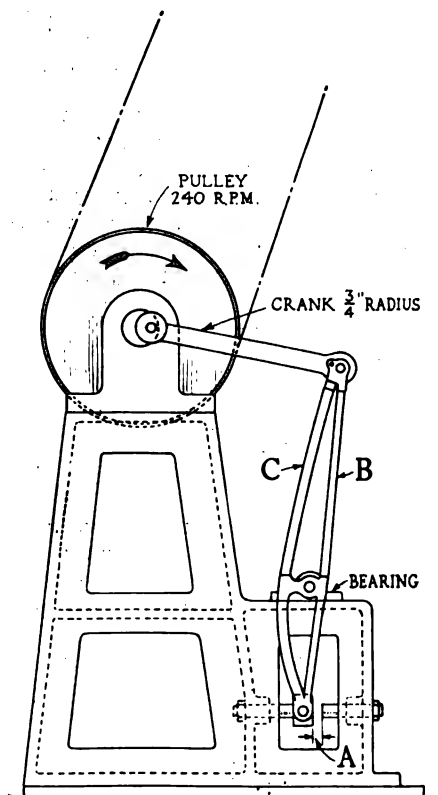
Testing Machine for motorcycle forks. Dimension "A" is so arranged that the fork under test shall move at this point $\frac{1}{4}$ in. less than the theoretical movement (according to the dimensions of machine parts and fork), this making the fork bend, i.e., tubes "B" and "C" are alternately in tension and compression
